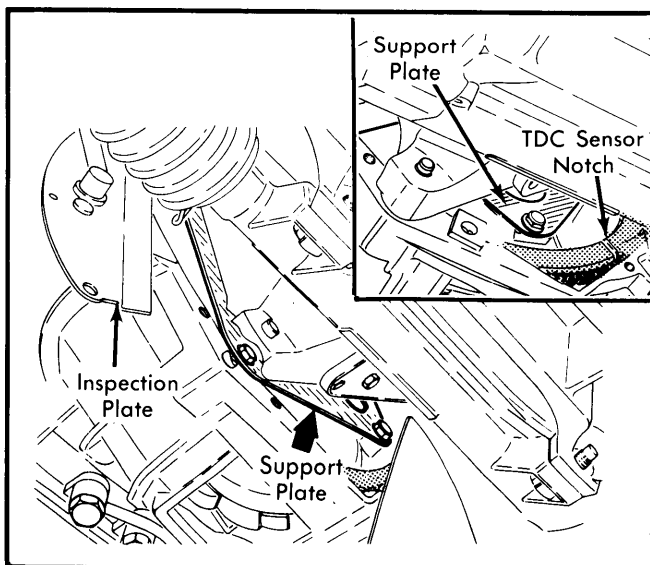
Positioning Support Plate for Torque Converter During Engine Removal
